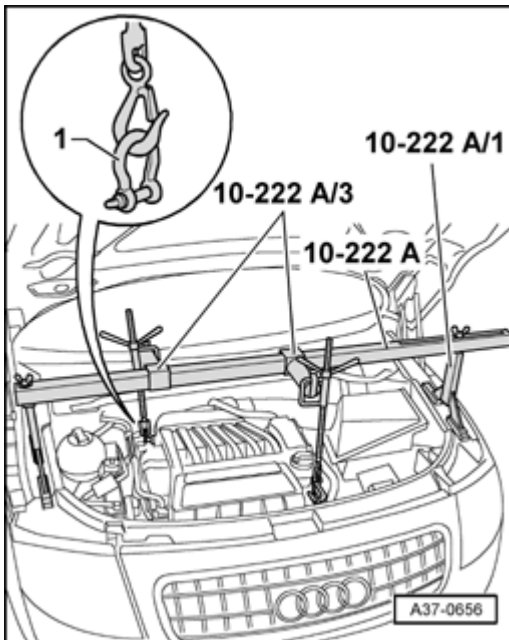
Setting Up Support Bracket 10-222 A With Adapters 10-222 A/3 On Surface Of Panel Flange
